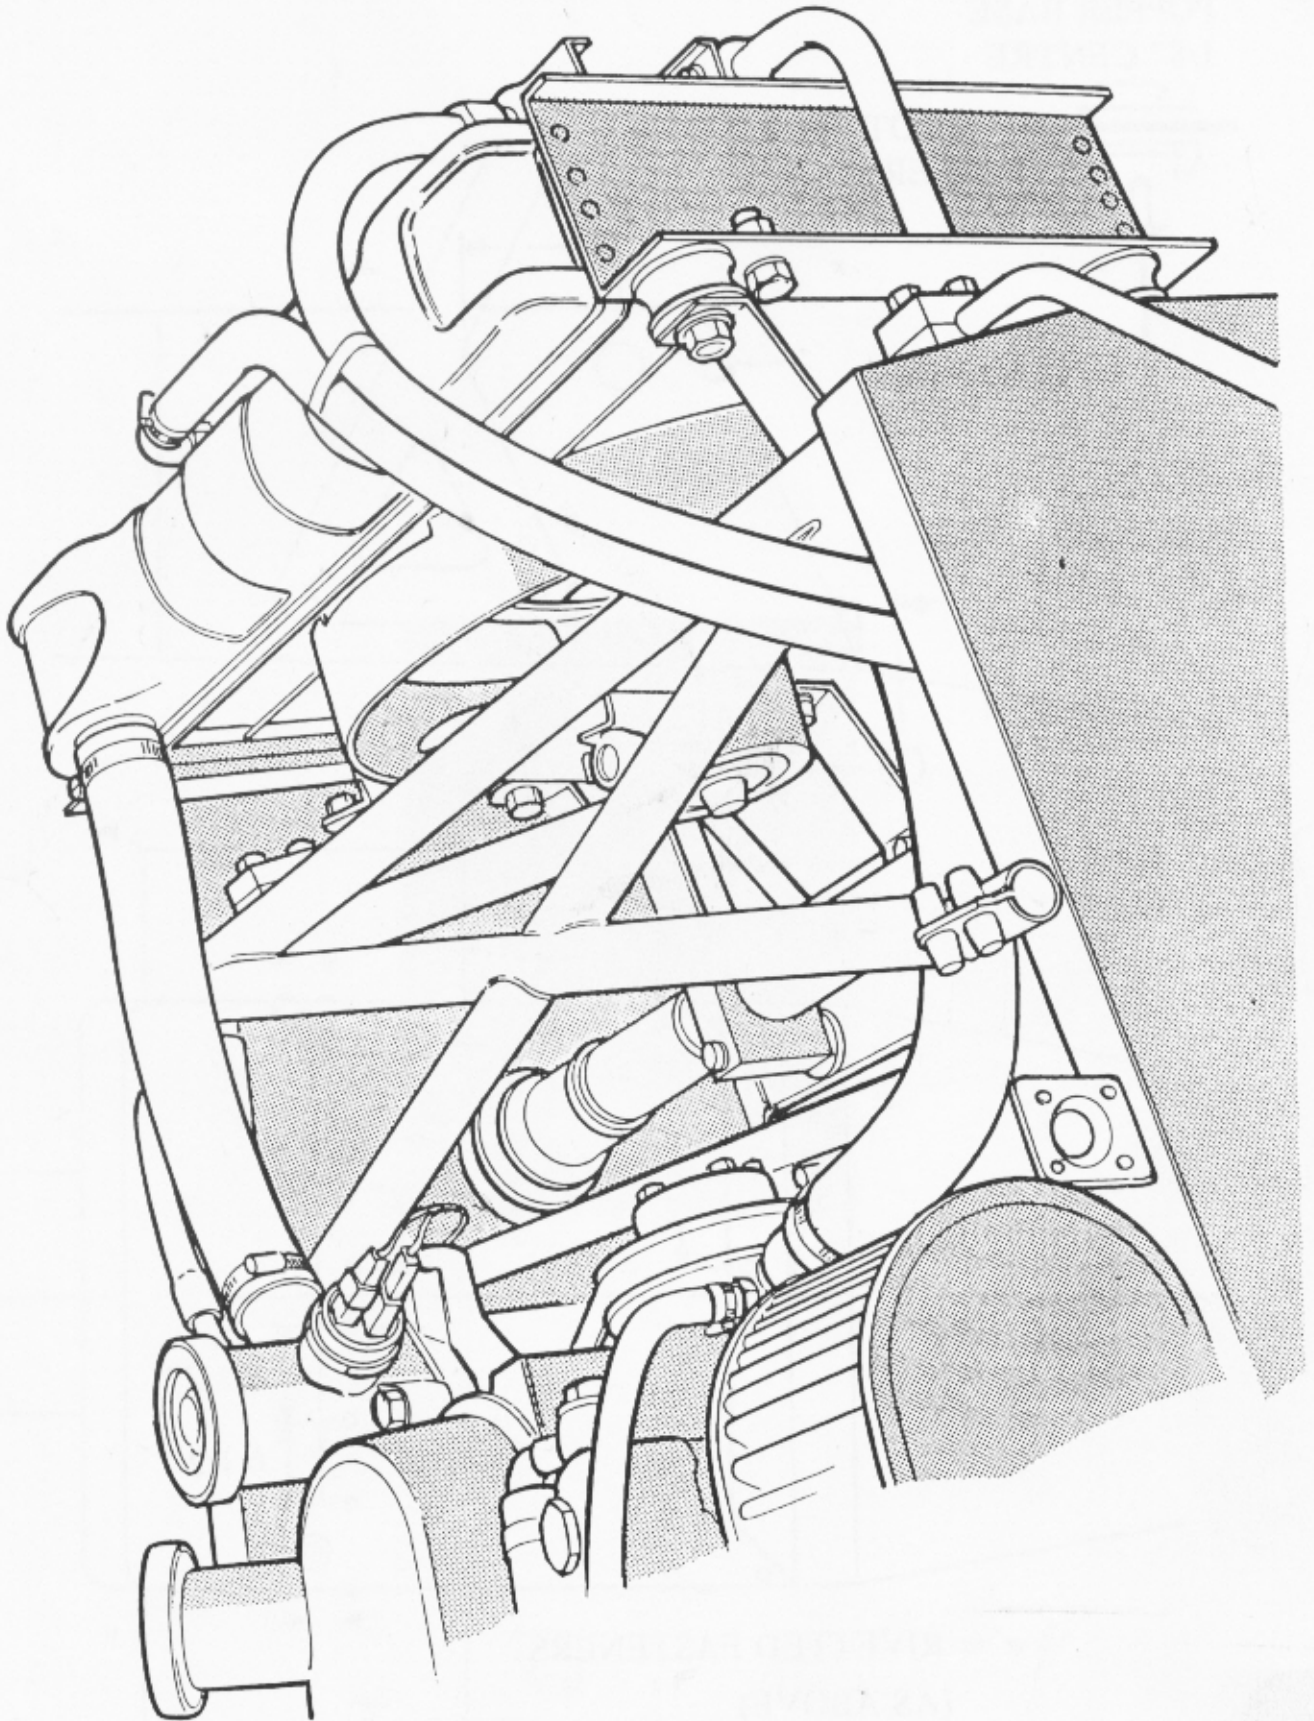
B Oil Cooler Pipes Layout (Rear View)
